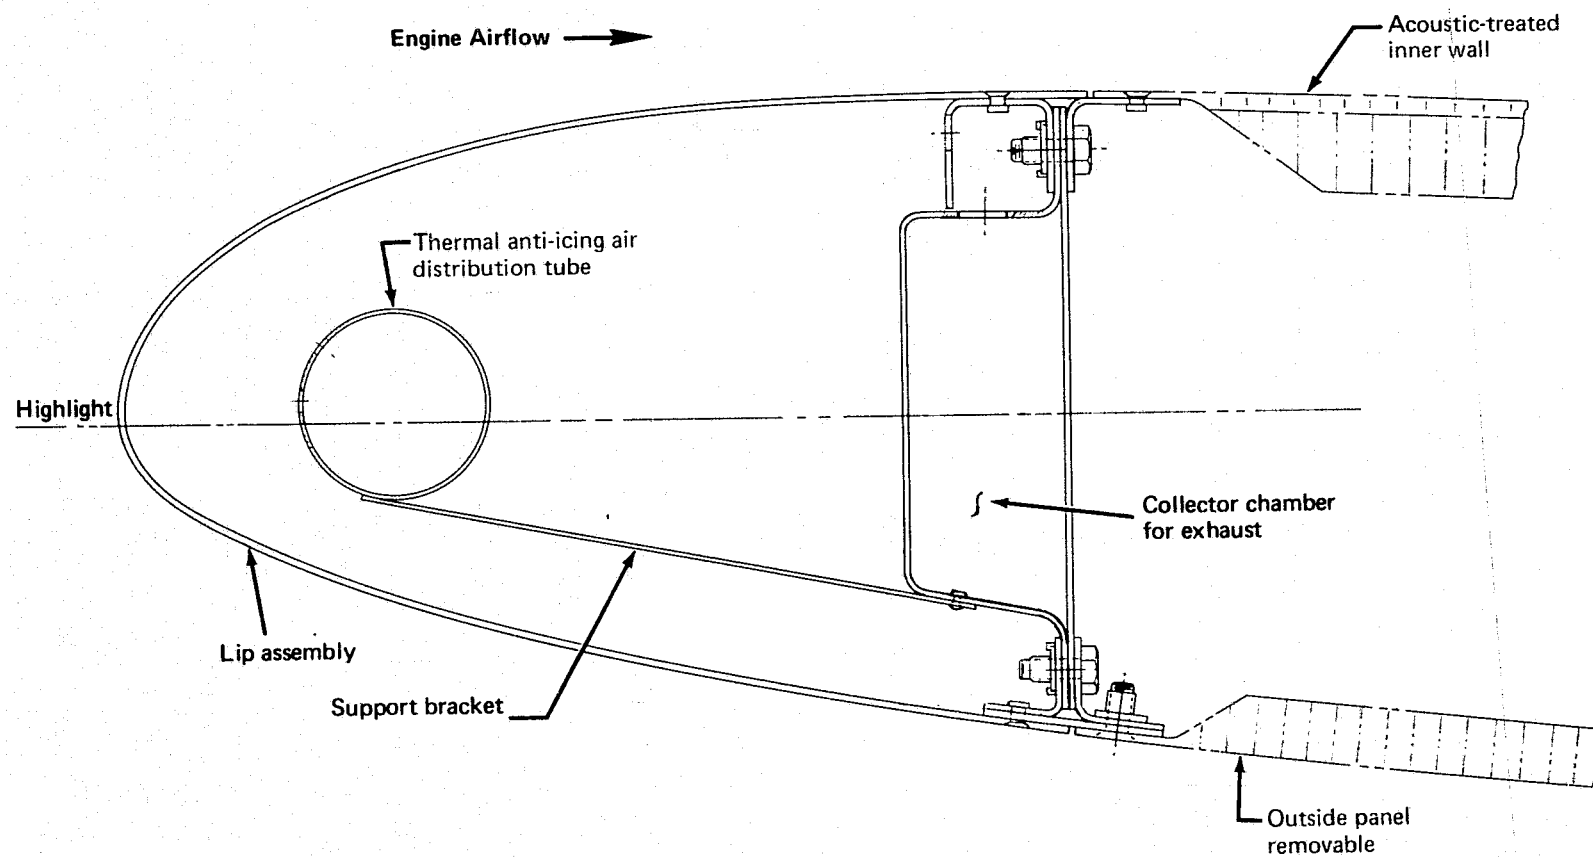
JT8D Refan Lip Assembly—Center-Engine Inlet Duct
